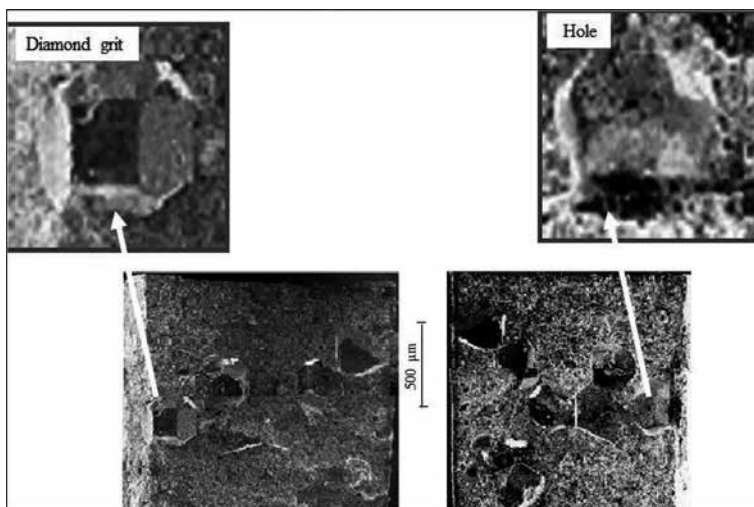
Two antagonistic metal-matrix-diamond fracture surfaces.
